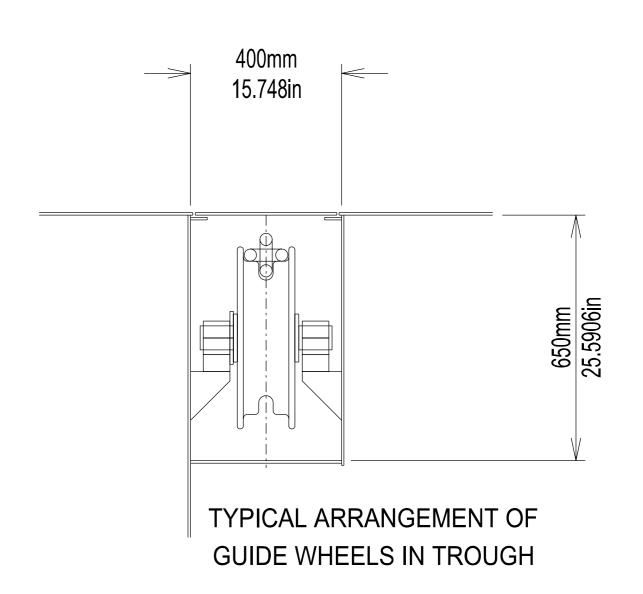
/02/201 Rev 0, Sheet 2 - Chain Guide Wheels
